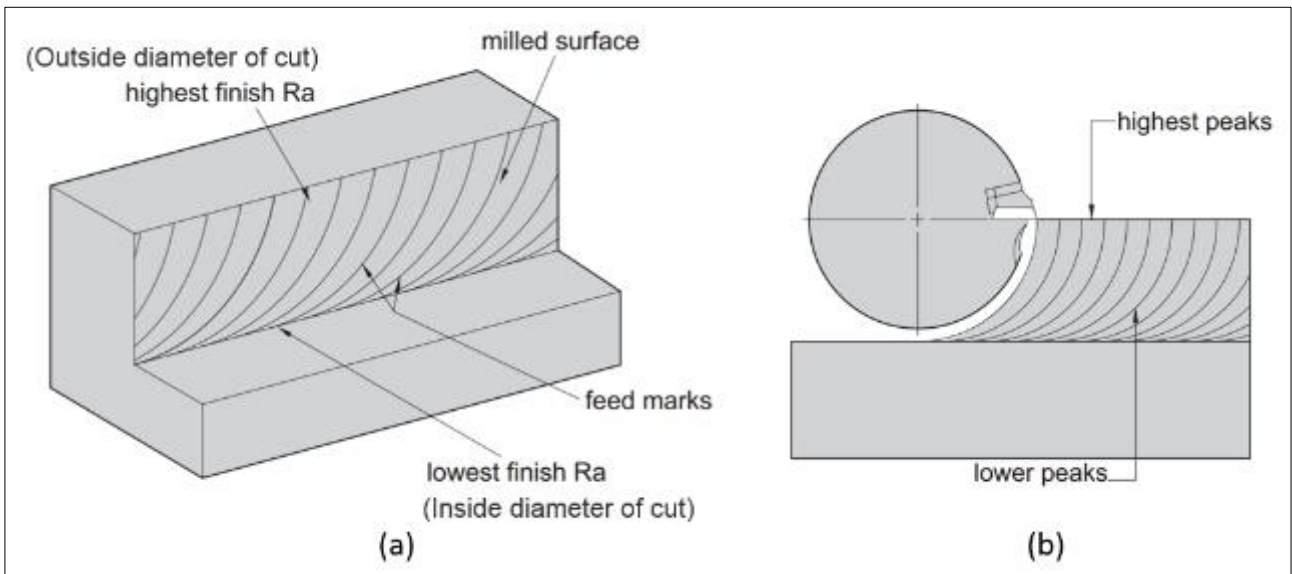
Surface finish face milling (a) Isometric view after milling (b) Top view during milling [45]
